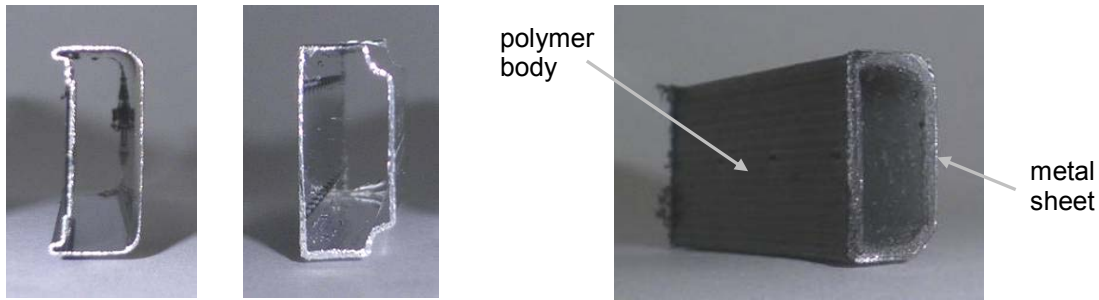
C-shape steel spacer, T-shape aluminum spacer, D-shape two-part spacer design.
